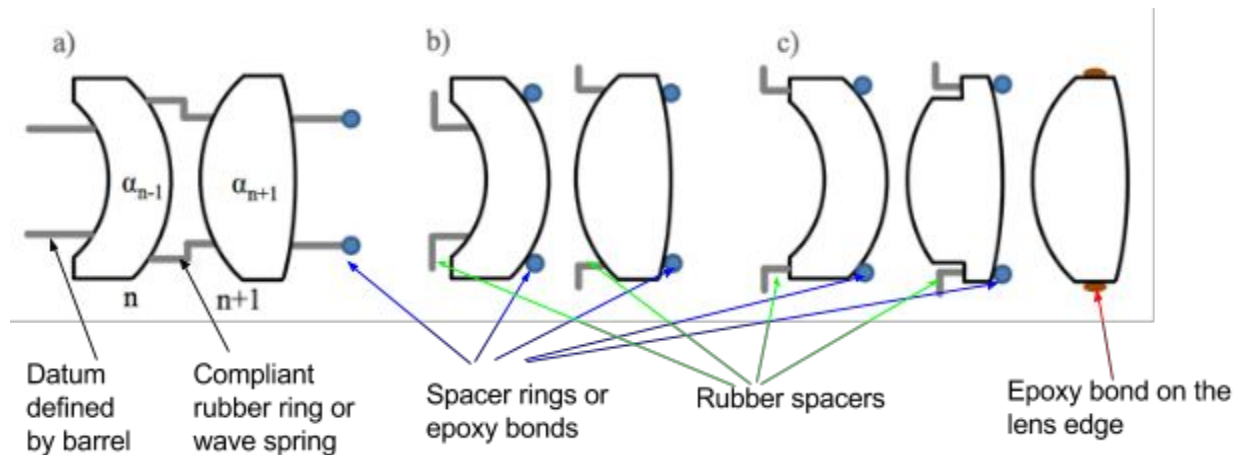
Three lens mounting schemes for setting up the thermo-optomechanical model. (a) rubber tube model; (b) and (c) rubber spacer model.
